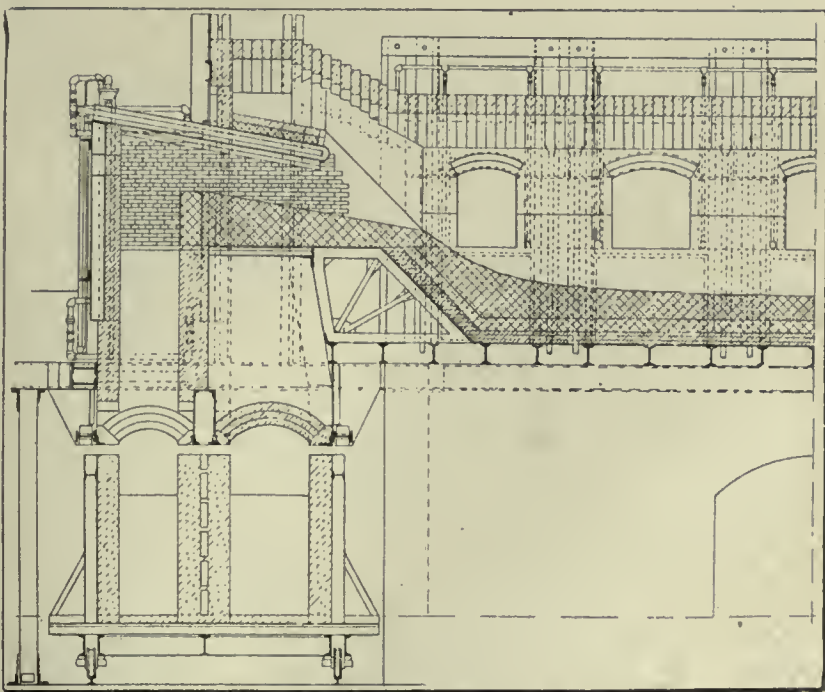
LONGITUDINAL SECTION OF ONE-HALF OF A 60-TON BASIC OPEN-HEARTH FURNACE FITTED WITH BLAIR REMOVABLE SLAG POCKETS AND INDESTRUCTIBLE PORTS.
